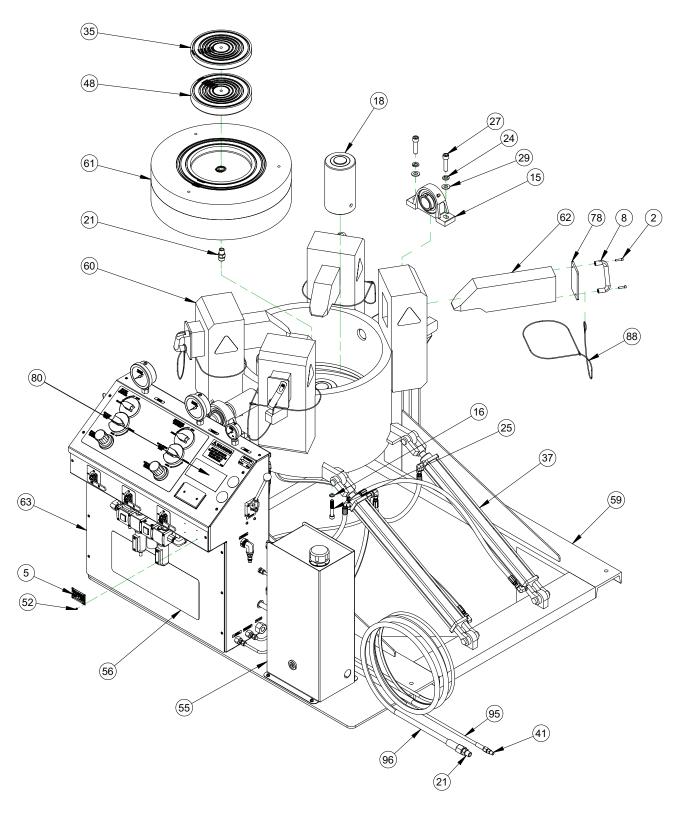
UFV-14-165T VALVE TESTER ASSEMBLY (P/N 88469)
